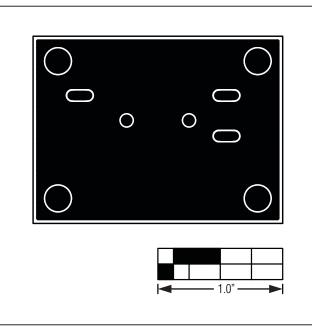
MAX9634 EV Kit PCB Layout—Solder Side
